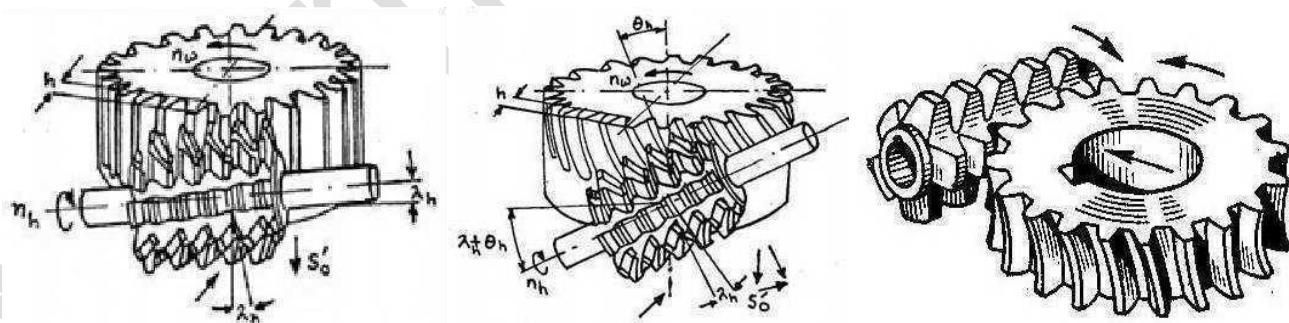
Generation of external gear teeth by hobbing (a) spur gear (b) helical gear and (c) worm wheel
